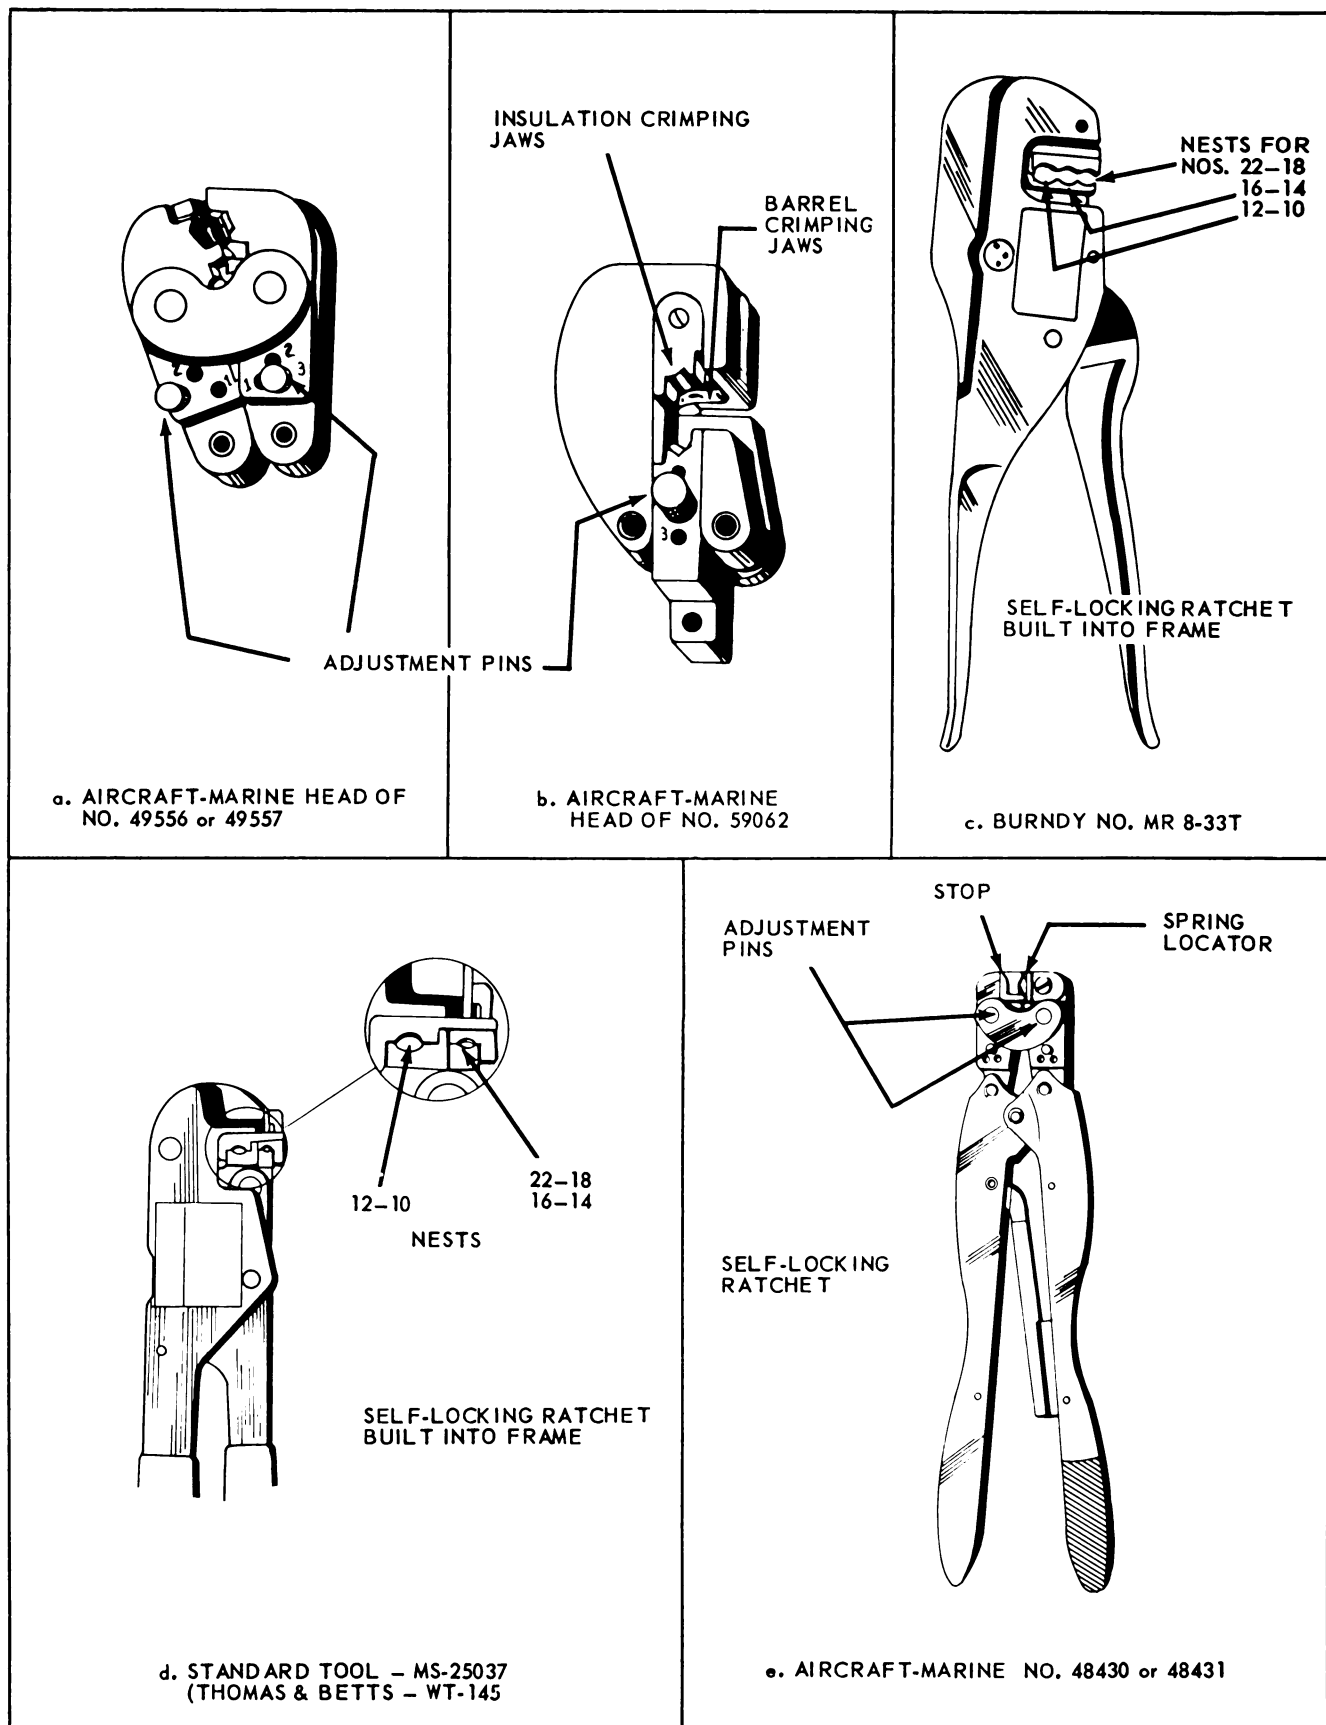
Tools - Hand Crimping - Pre-Insulated
